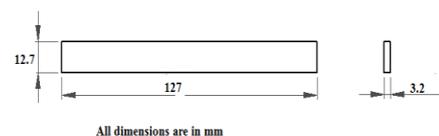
Dimensions of ASTM D 790 flexural test specimen.
